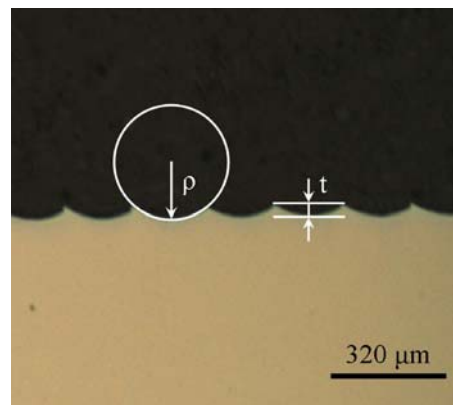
Longitudinal section at the test zone of a turned specimen.
